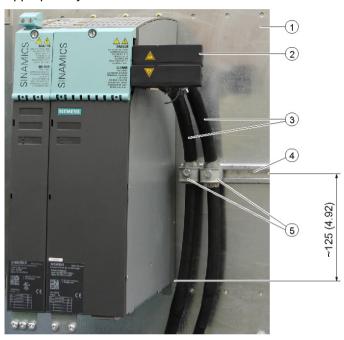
Single-core and two-core DC link connecting cable with insulated end sleeves, all dimensions in mm and (inch)
